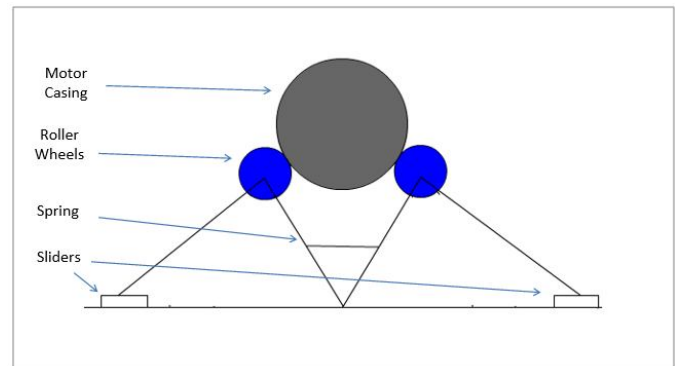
Wheel-Slider-Spring Rotary Mechanism
